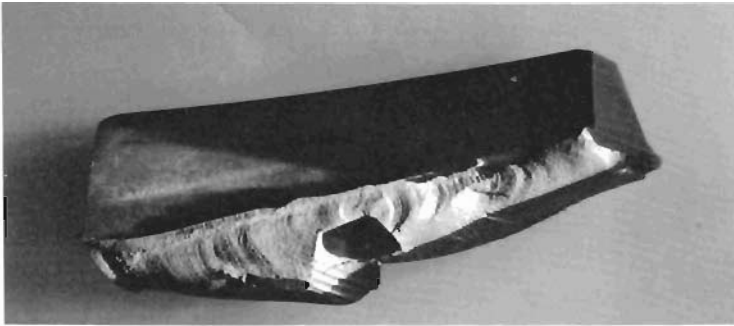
Spiral bevel gear tooth, 0.7 \times . Tooth bending fatigue with origin at the apex of the drilled bolt hole, which terminated just below the root radius.
